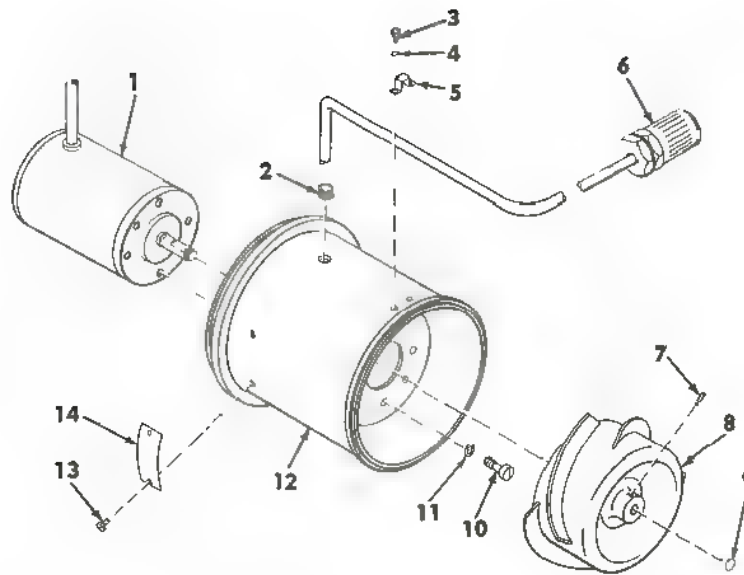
STOP /8515248/-EXPLODED VIEW
